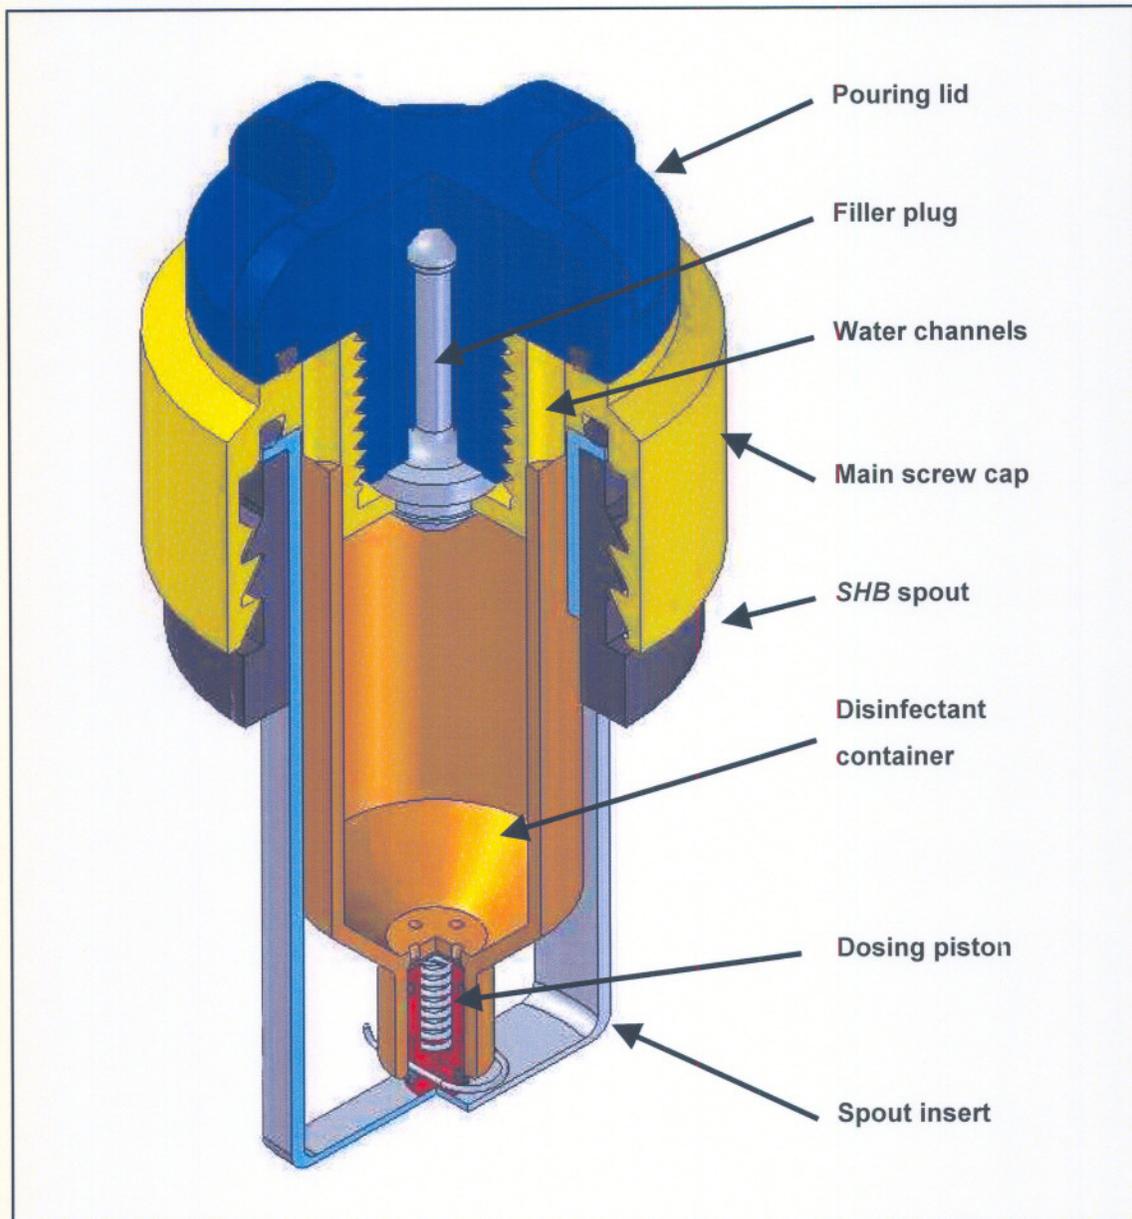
Quarter section view through *Dispenser* with insert for water container mouth
